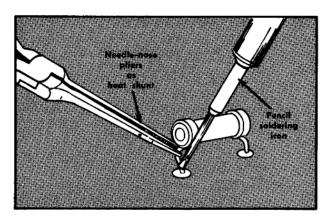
Apply the soldering iron to the heat-shunted lead when removing a component from a circuit card.
